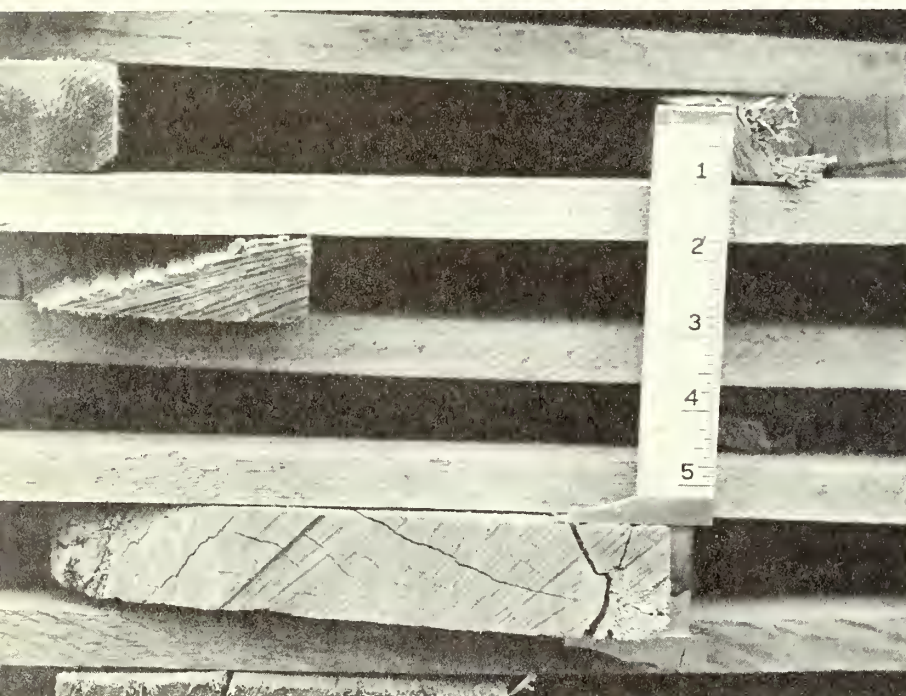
Wedge-shaped boards are termed "miscut." They cause undue waste and place an extra burden on planer knives.
